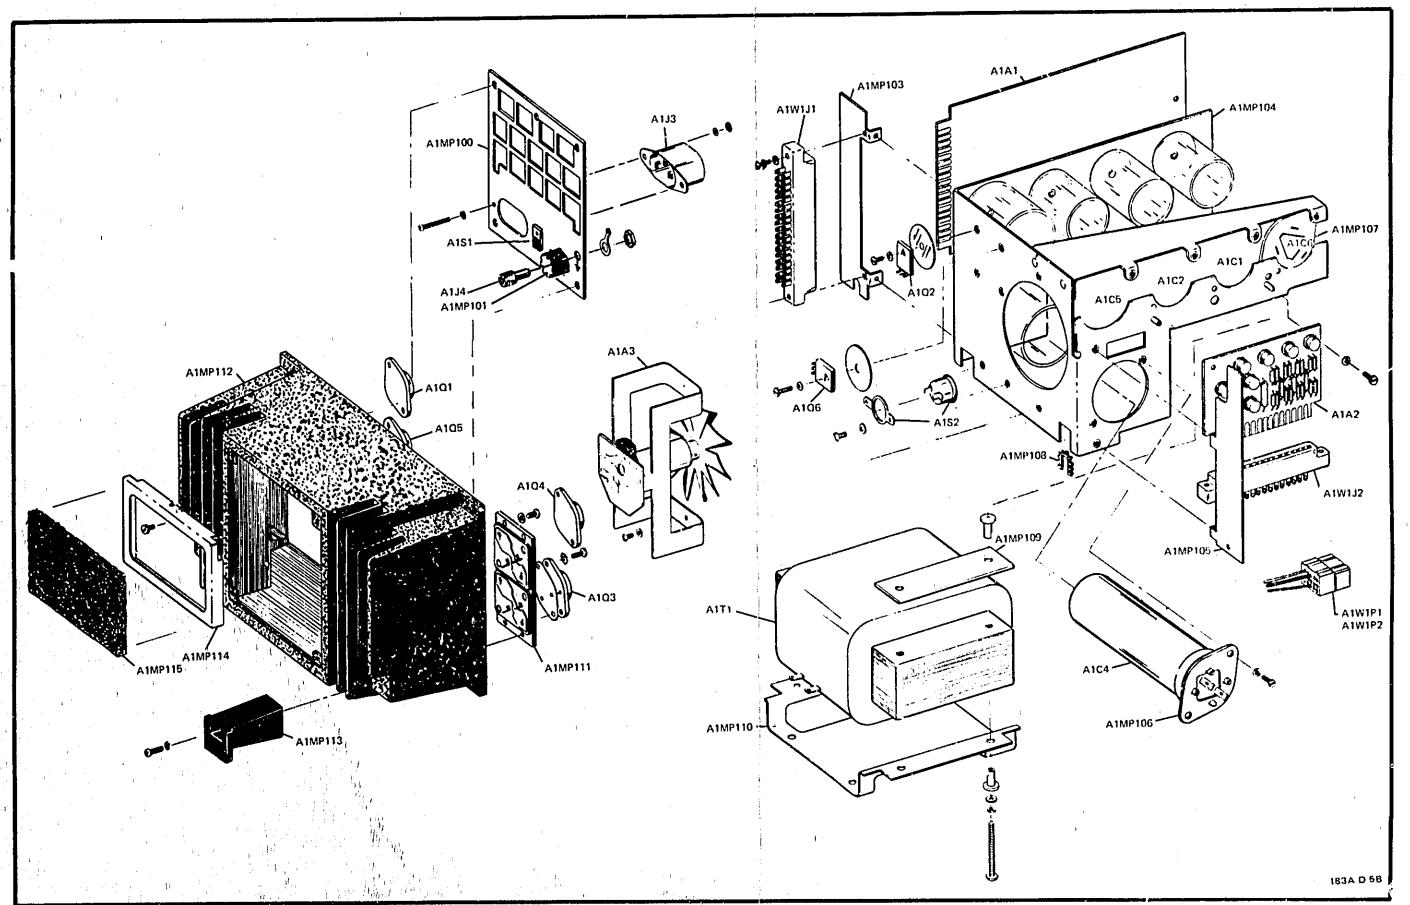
, Model 183A/B Illustrated Parts Breakdown (Sheet 3 of 3)
